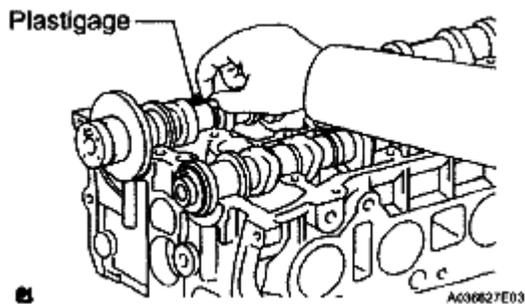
Laying Strip Of Plastigage On Camshaft Journals
